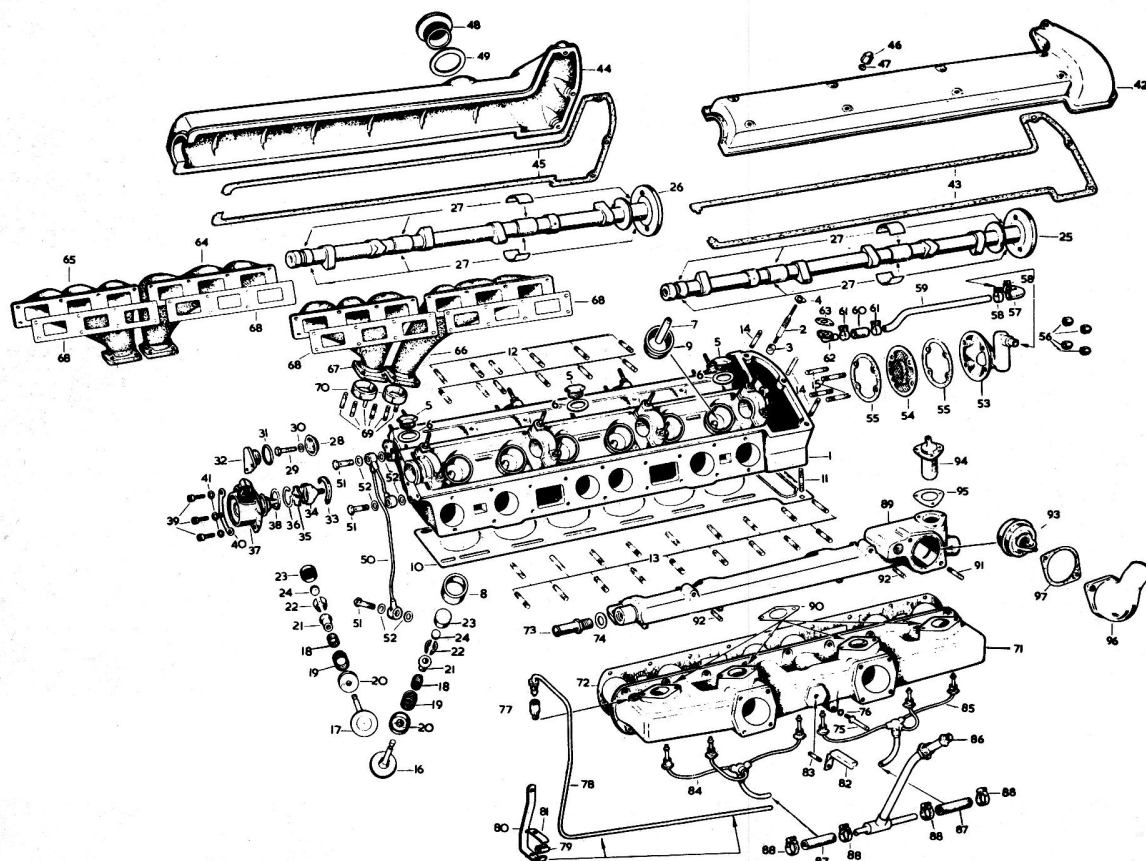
EXPLODED VIEW OF THE CYLINDER HEAD
